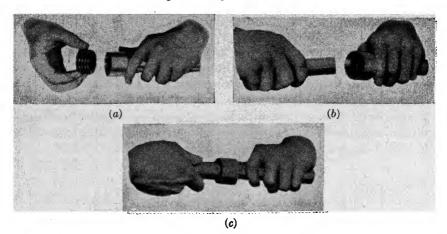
Assembling a small Flexlock coupling. (a) A rubber sleeve, with ribs inside and outside, is placed in the end of a pipe. (b) The end of a pipe of smaller diameter is pushed into the sleeve. (c). The resulting joint will resist a strong direct pull but can be separated by a twisting, unscrewing action. Typical dimensions for which these couplings are made are:
